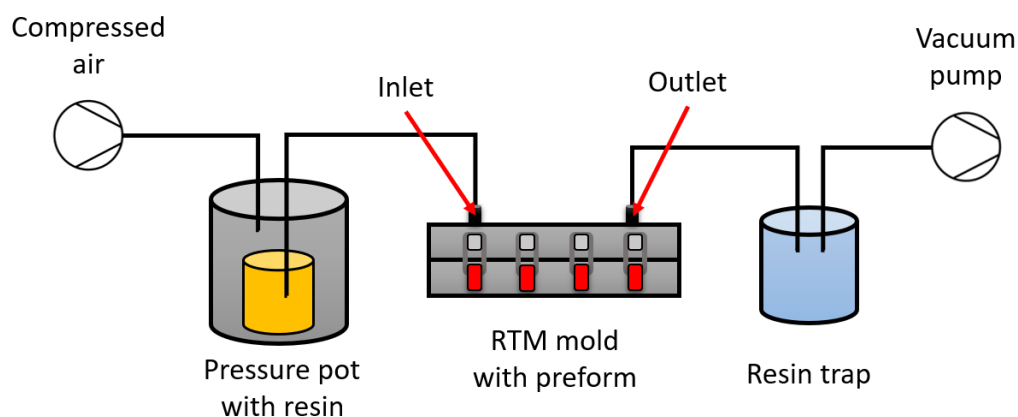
Resin transfer moulding setup for bicycle stem moulding/
